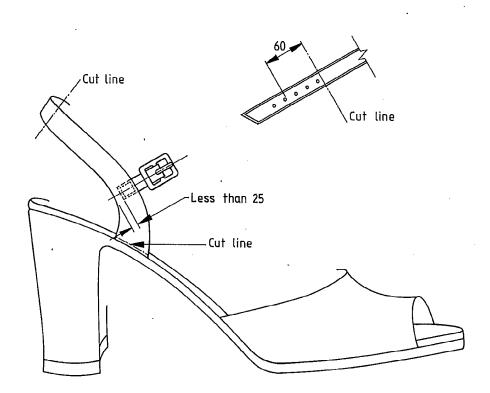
/8a. Buckle strap attached to a sling-back strap (Strap not wide enough to enable a type A test piece to be cut. The type B test piece shown in figure 5.11/8b and 5.11/8c needs to be used.)
